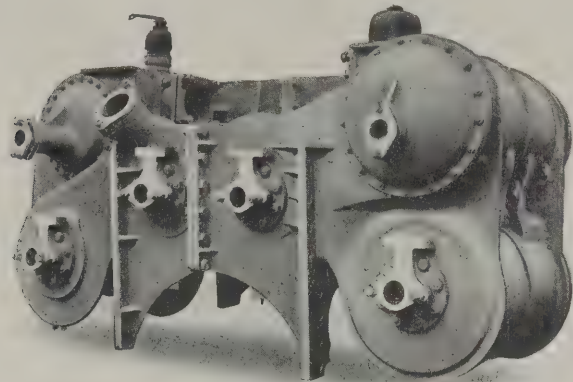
Cylinders and Valves, Adriatic Type Engine.
